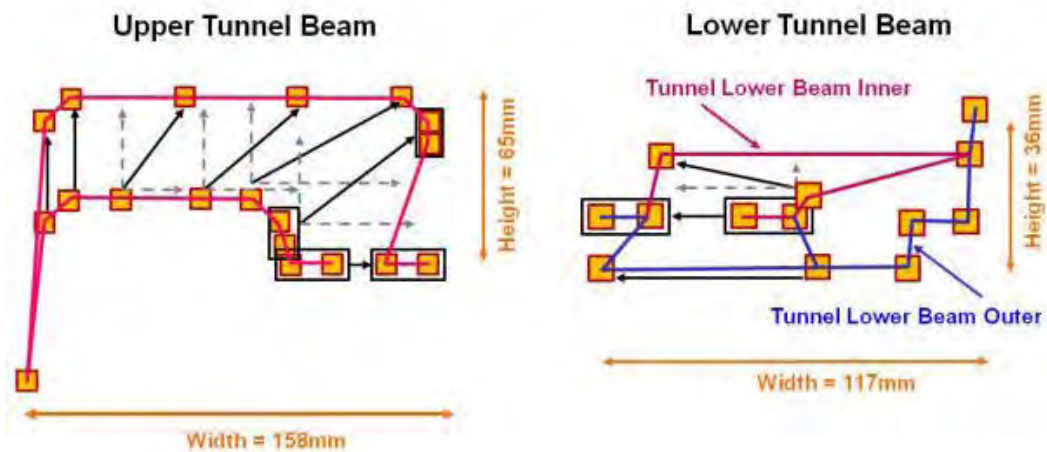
Open roll formed tunnel rail concept - cross-sectional parameterization
